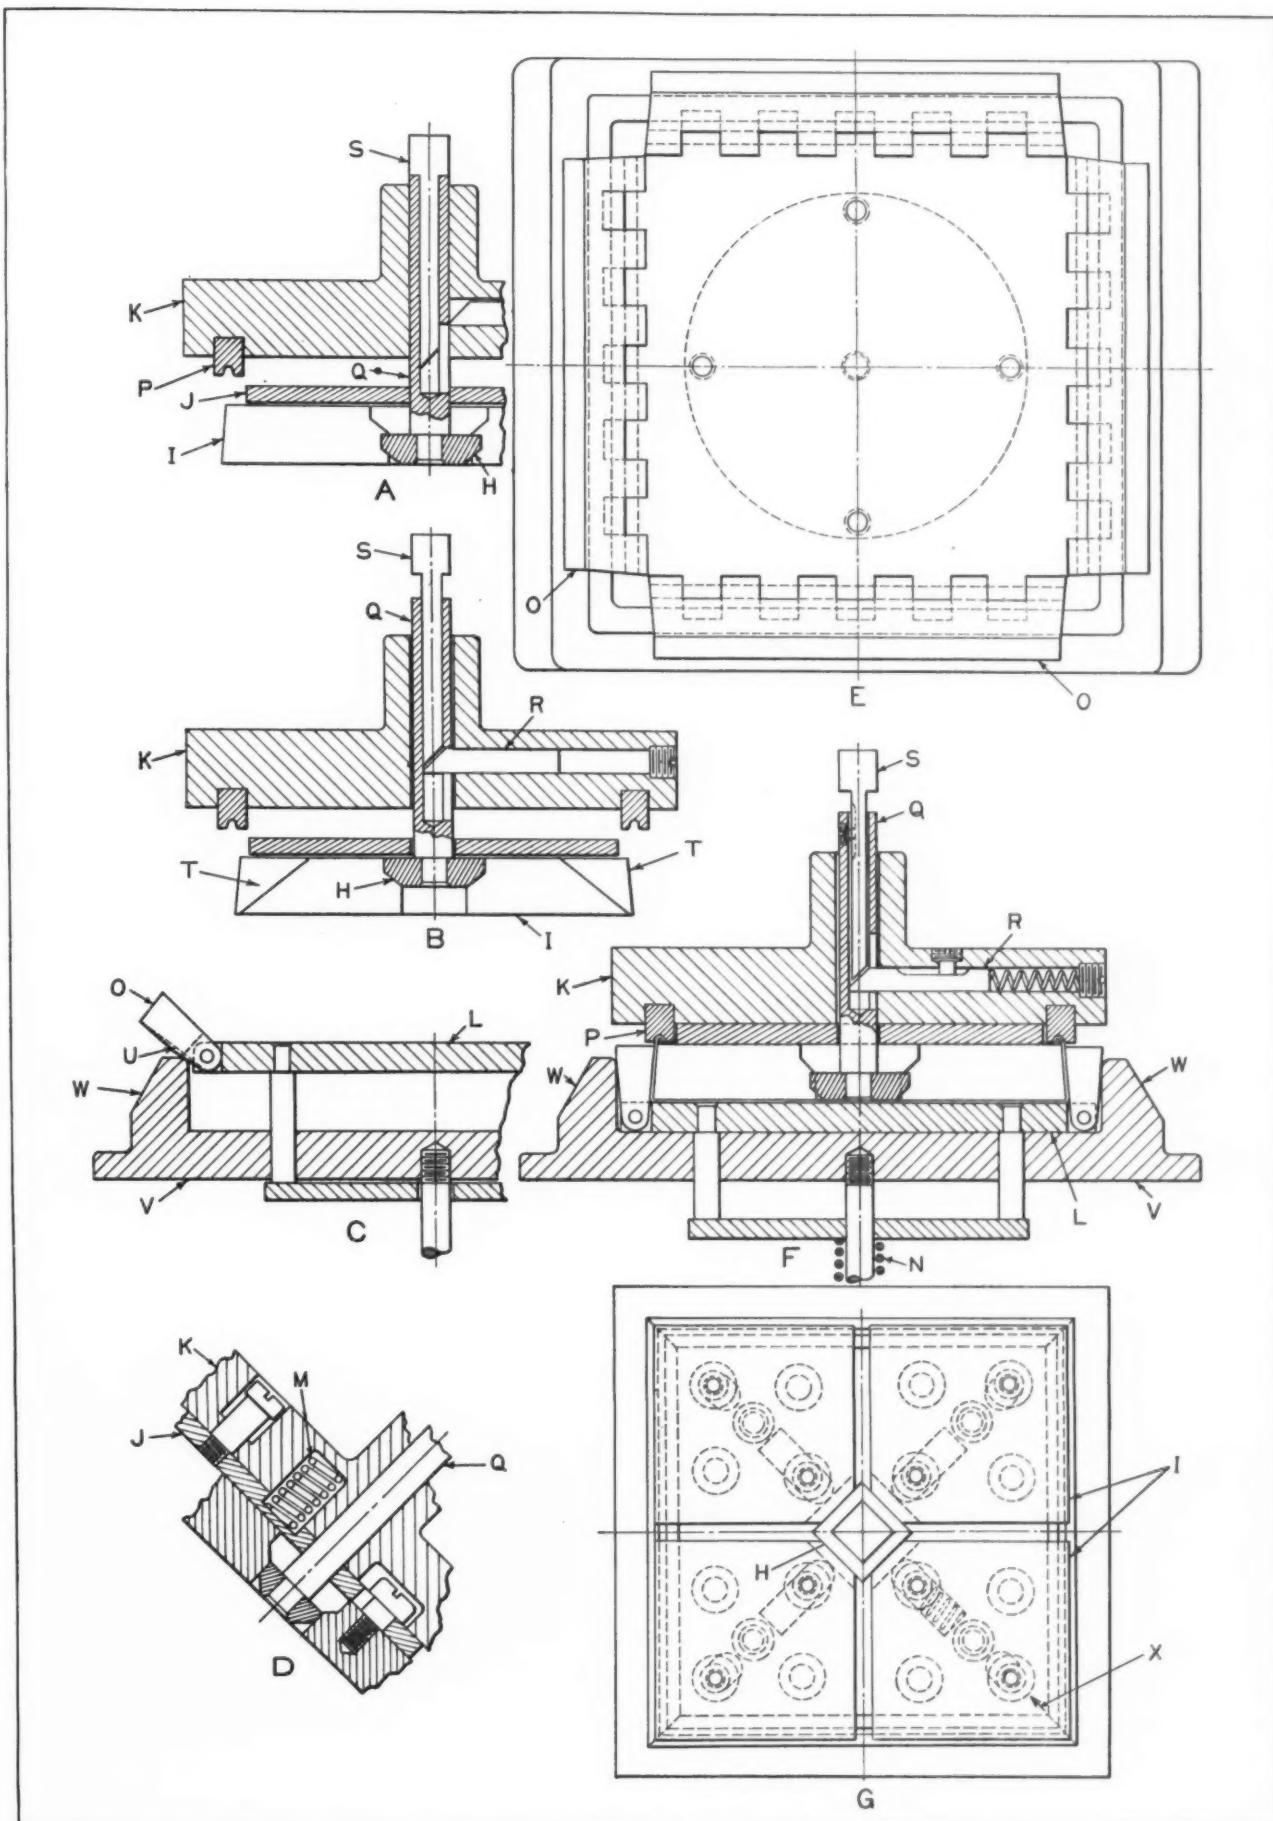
Plan and Assembly Views of Punch and Die Used in Producing the Box Shown in Fig. 1
